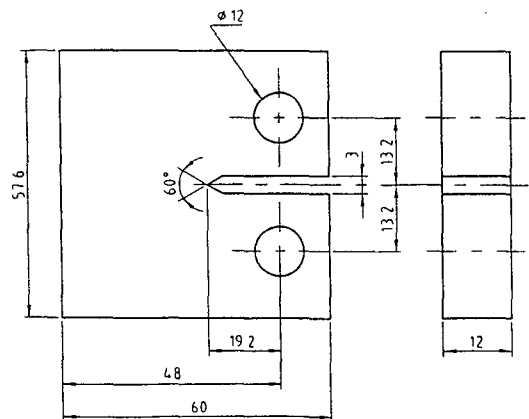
Geometry and dimensions of C.T. specimen (t=12mm)
